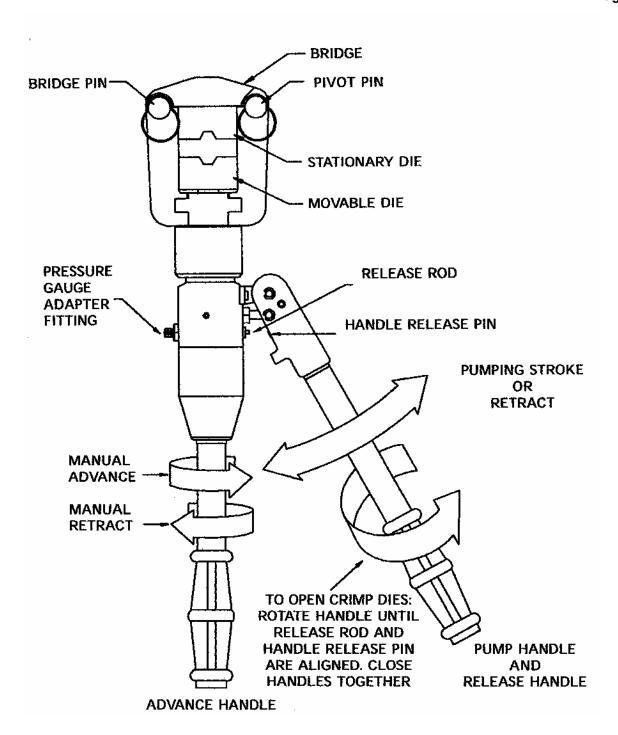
HH80C Hand Actuated Hydraulic Crimp Tool (Sheet 1 of 3)
